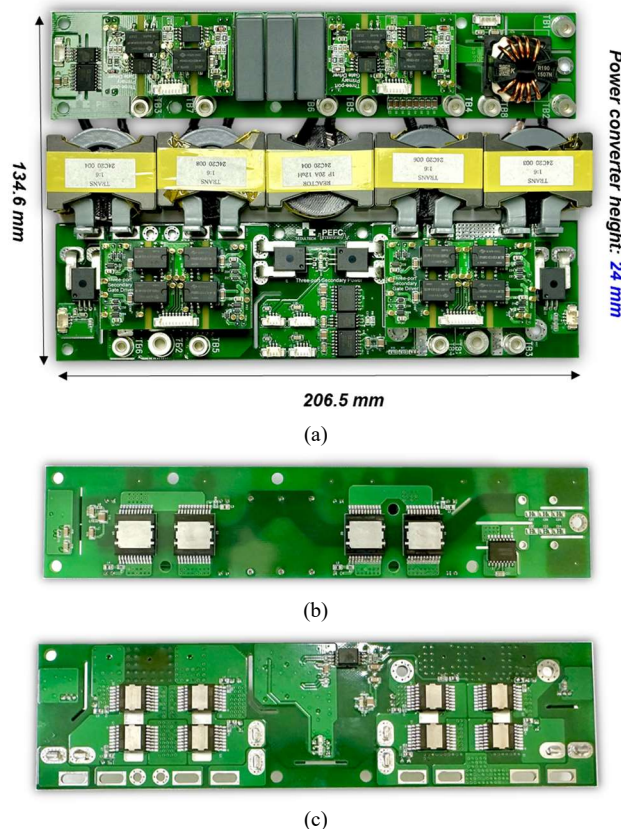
Prototype of the proposed APM converter: (a) Top view prototype, (b) bottom view of HV side PCB, and (c) bottom view of LV side PCB.
